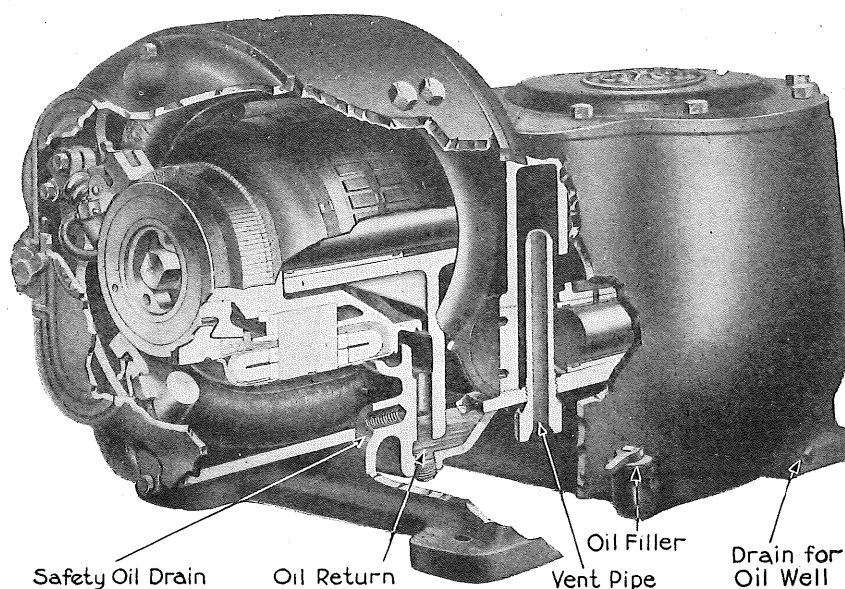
Air Compressor Showing Oil Return from Motor to Compressor and Crank Chamber Vent Pipe
